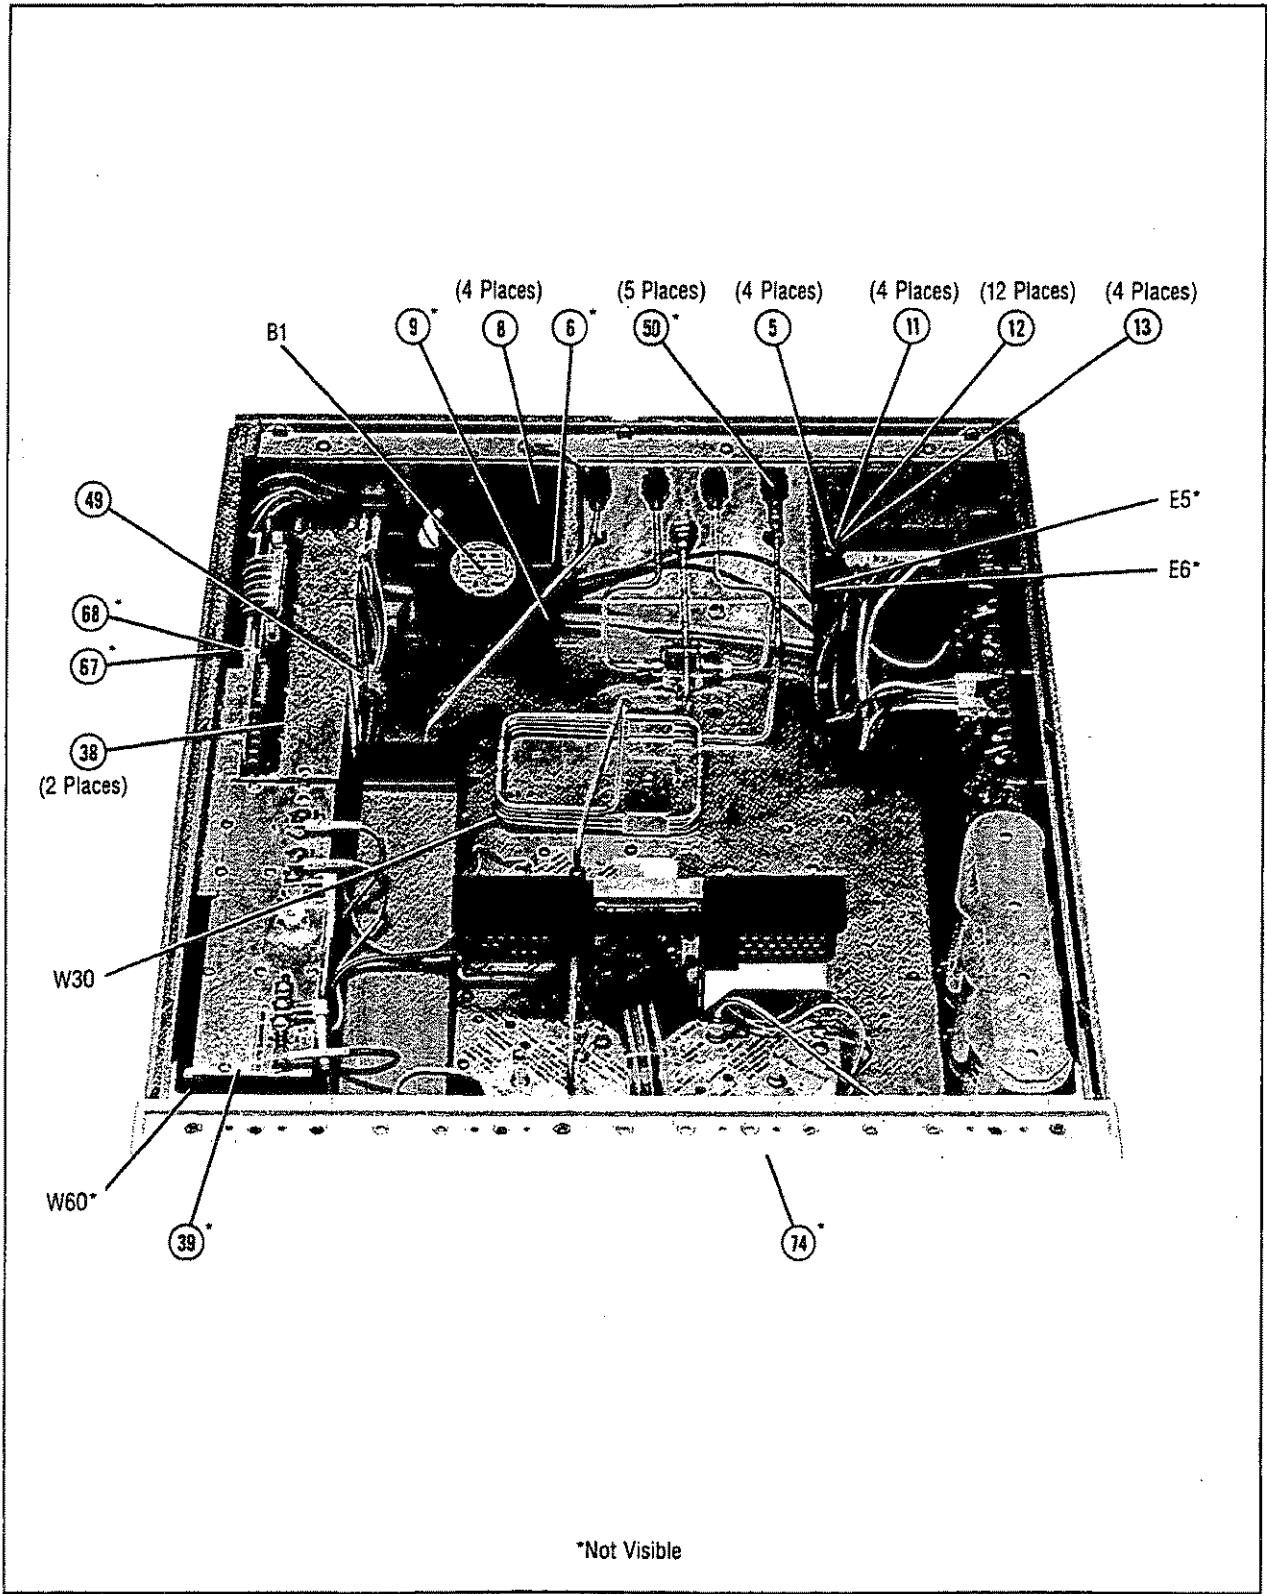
HP 8513A Miscellaneous Mechanical, Chassis, and Electrical Parts (4 of 5)
